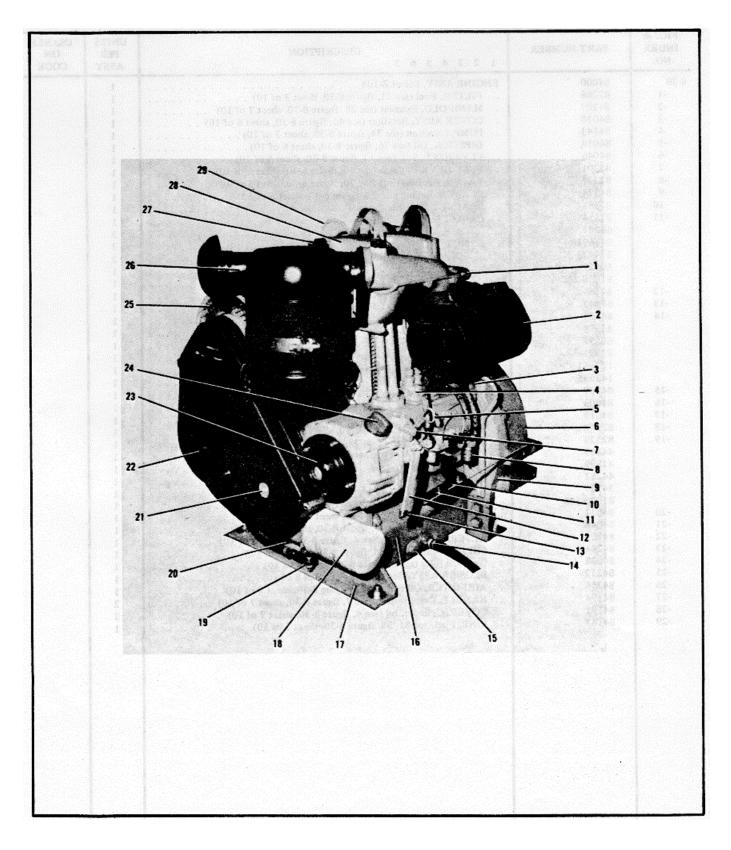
Diesel Engine Assembly (Sheet 1 of 10)
